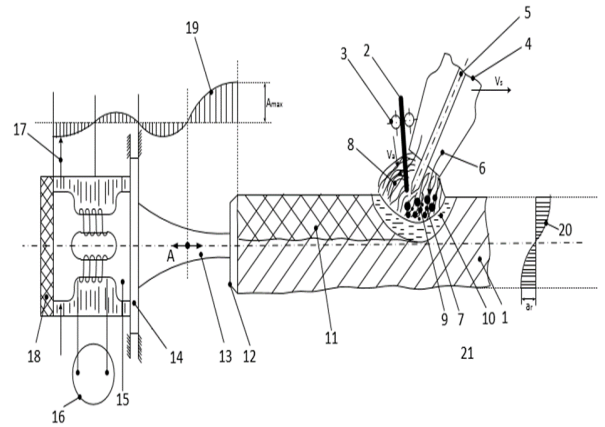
Ultrasonic energy penetration in a paralel plane with welding direction
